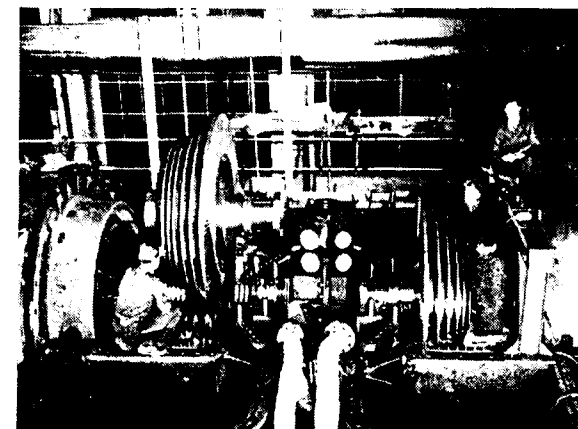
Mounting the axial-flow blading in a Durax turbine. (F 375)
